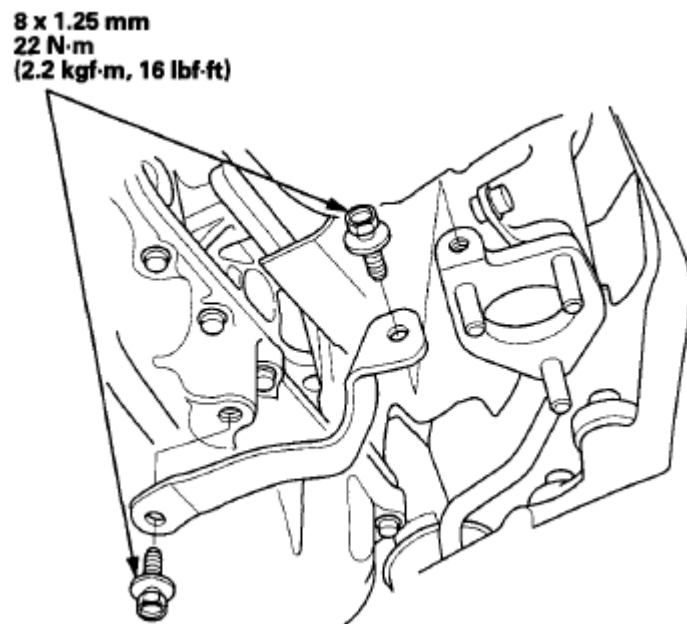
Installing Rear WU-TWC Bracket With Torque Specifications
